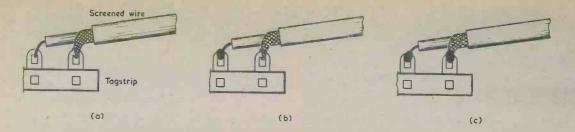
(a). When soldering a thin screened wire to two tags, start by putting the centre lead and braiding in place on the tags (b) Next, solder the centre lead
